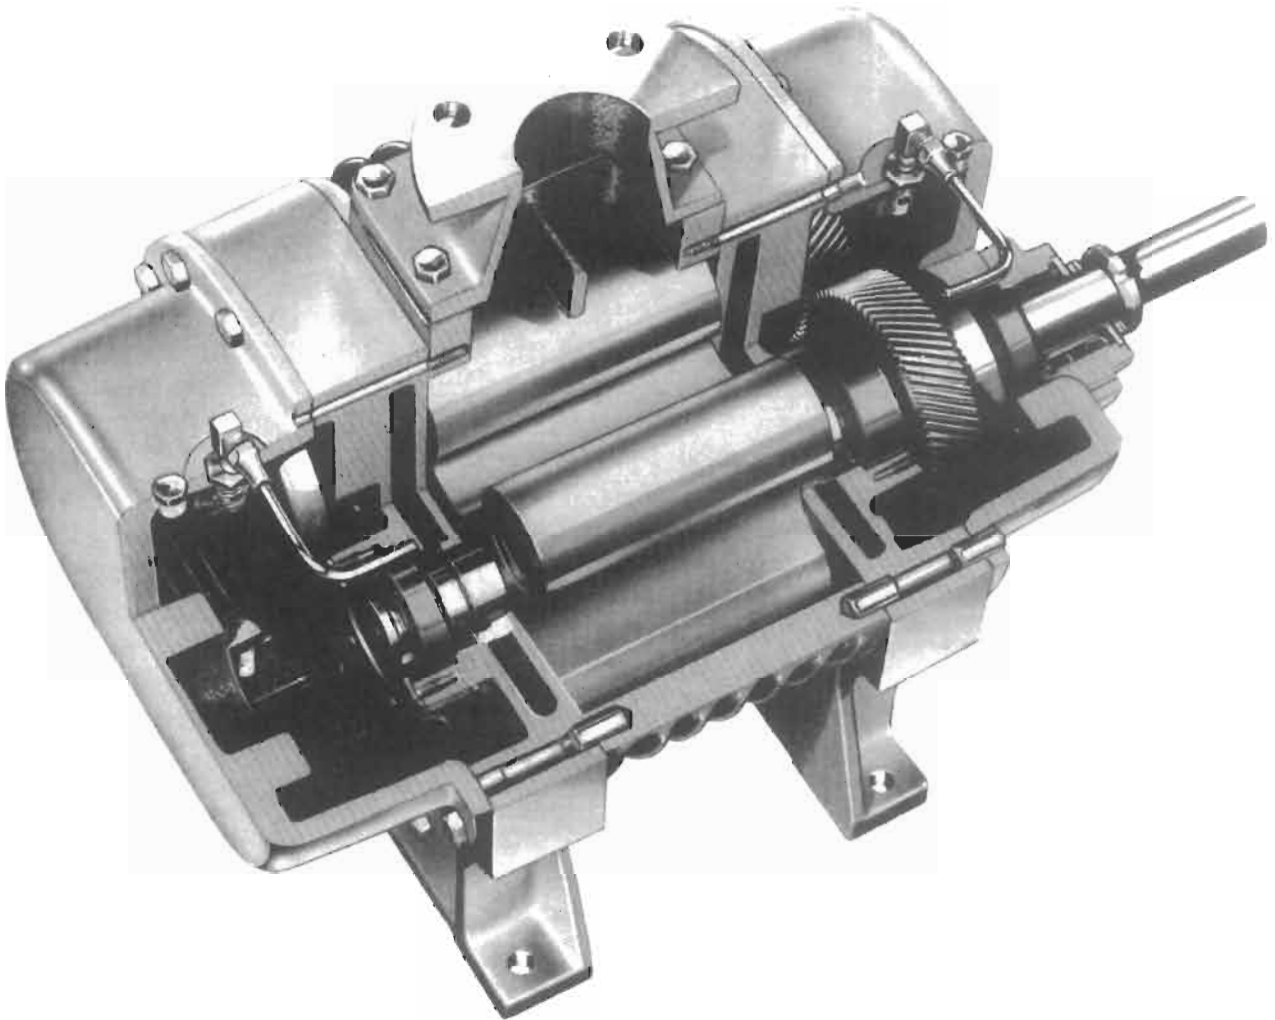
Cut-away view of internal assembly of rotary lobe vacuum pump. By permission, Tuthill Corp., M.D. Pneumatics Div., Bull. A-5/888.
